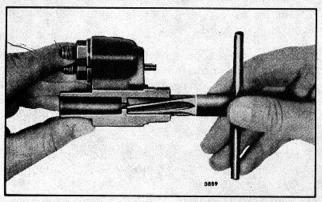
Cleaning Injector Body Ring with Tool J 21089
